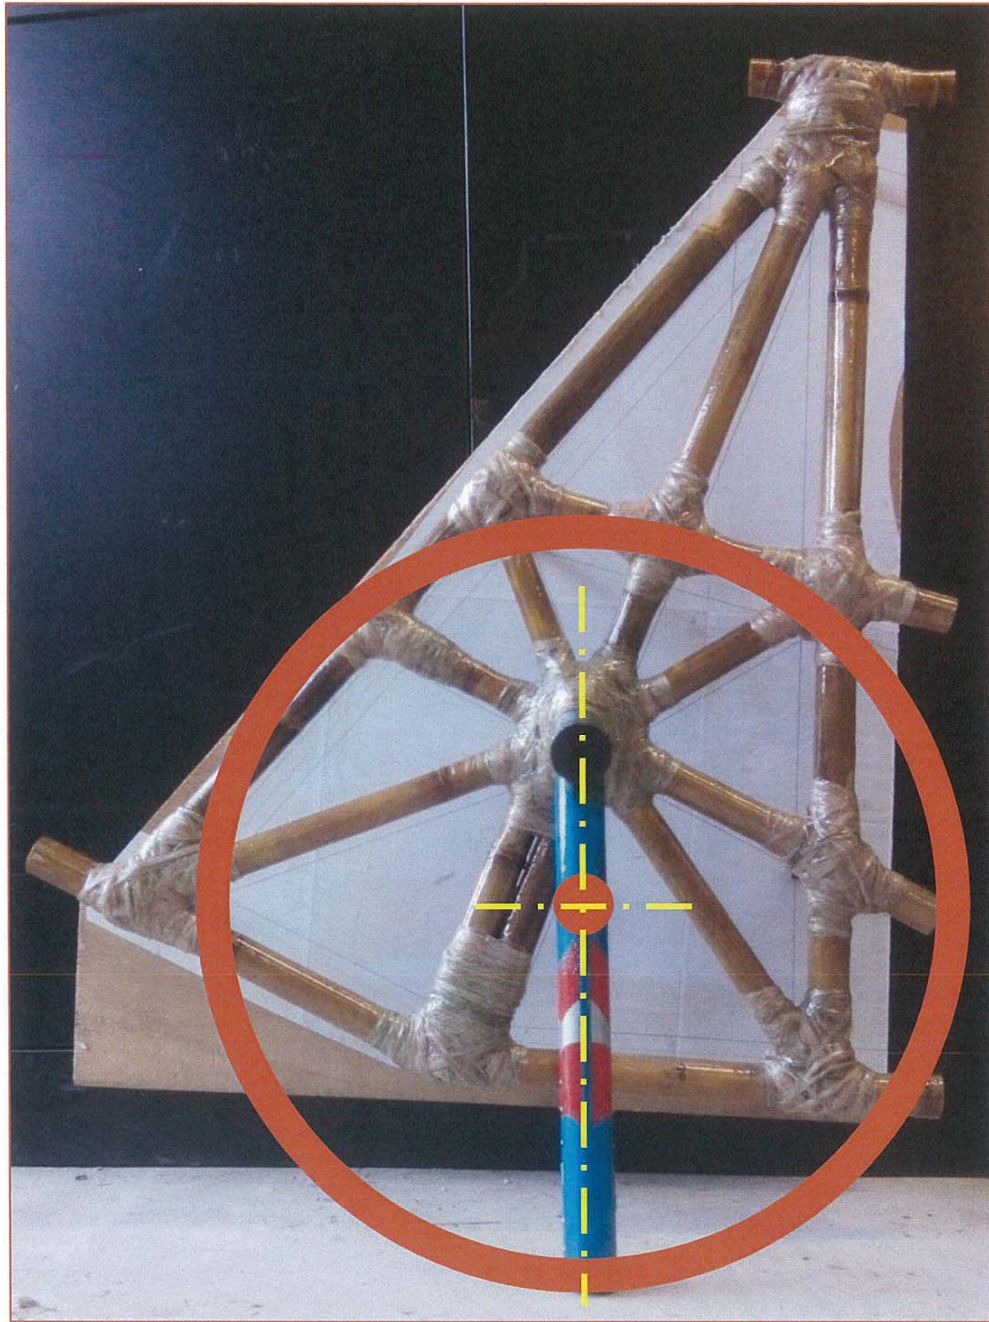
Overlay of front wheel position on loading member of frame section showing alignment of wheel contact patch with ground
